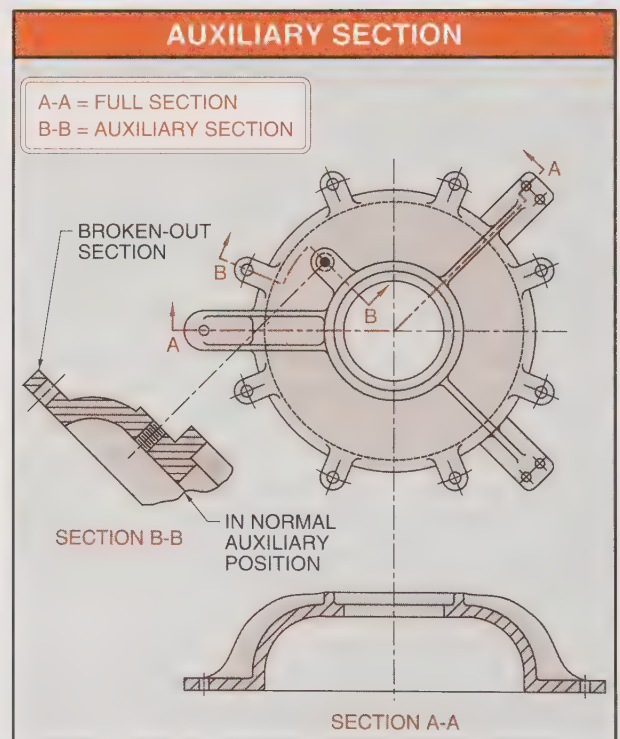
An auxiliary section is a sectional view that is not one of the principal planes.
